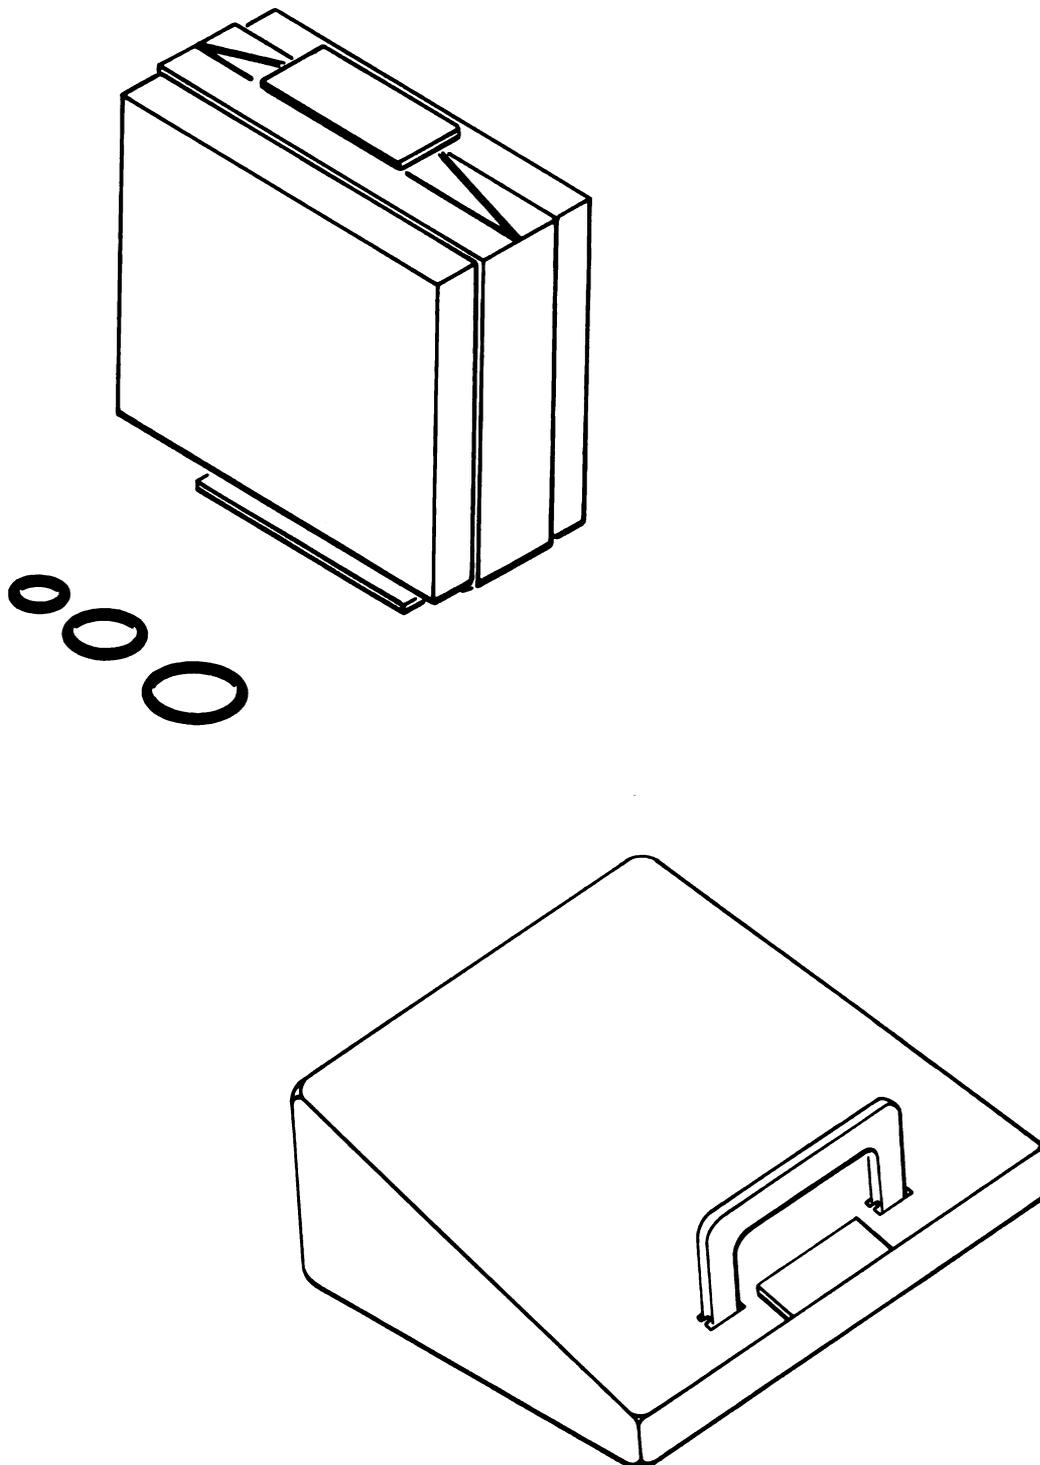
O-Ring Kit and O-Ring Fabrication Kit.
